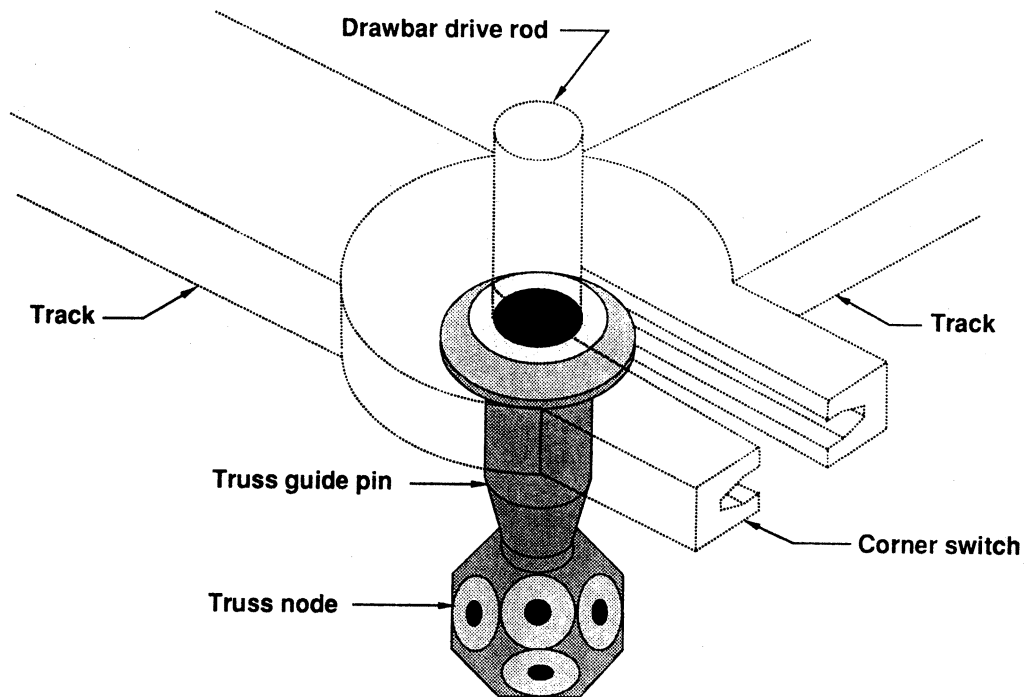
Mobile Transporter corner switch, guide pin, and drive rod arrangement.
